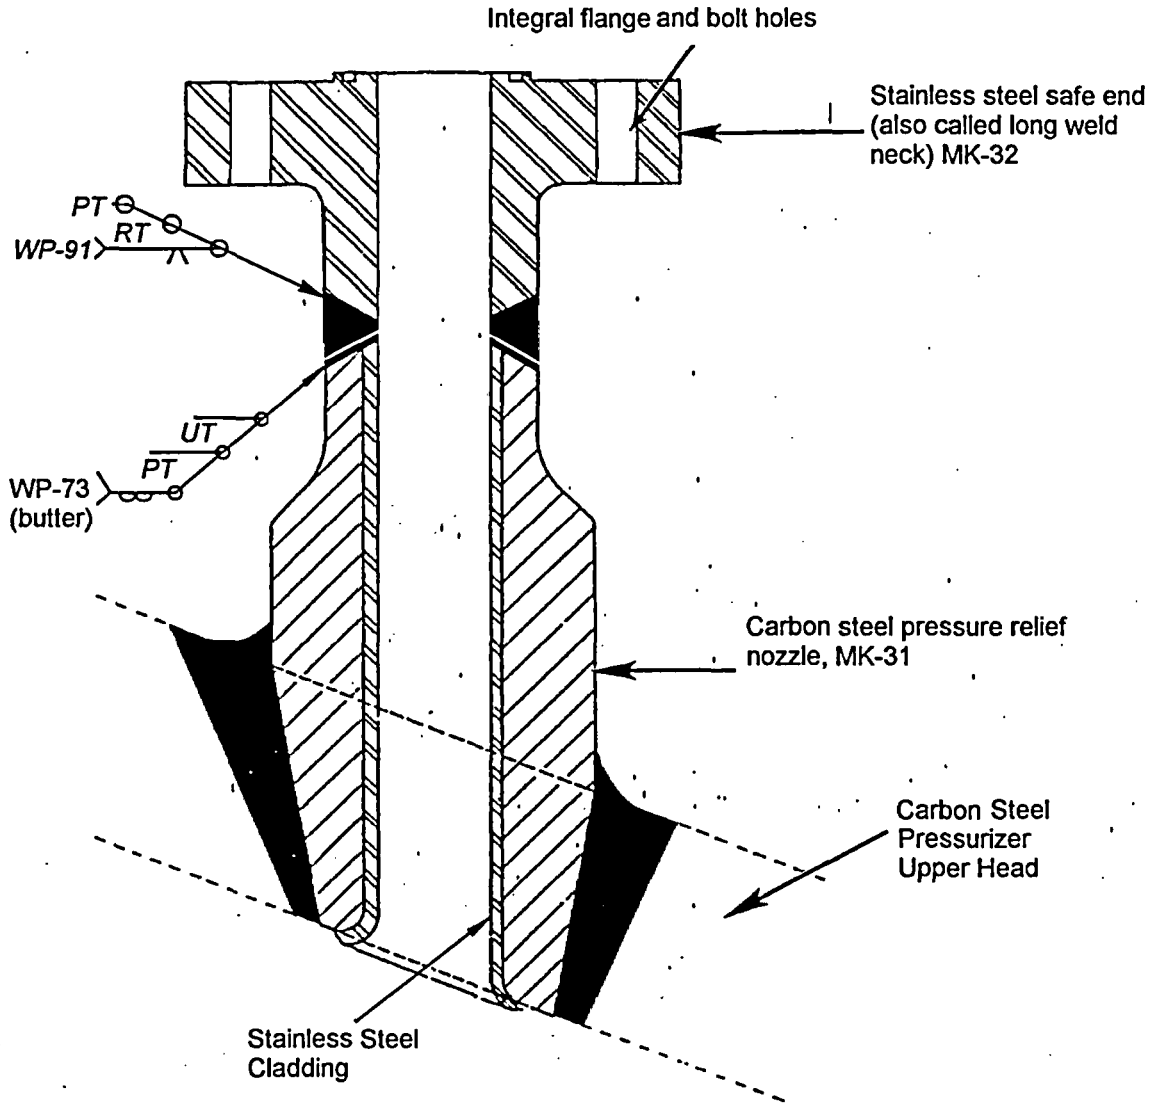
Detail of the three 2½-inch pressure relief nozzle to stainless steel safe-end weld.
